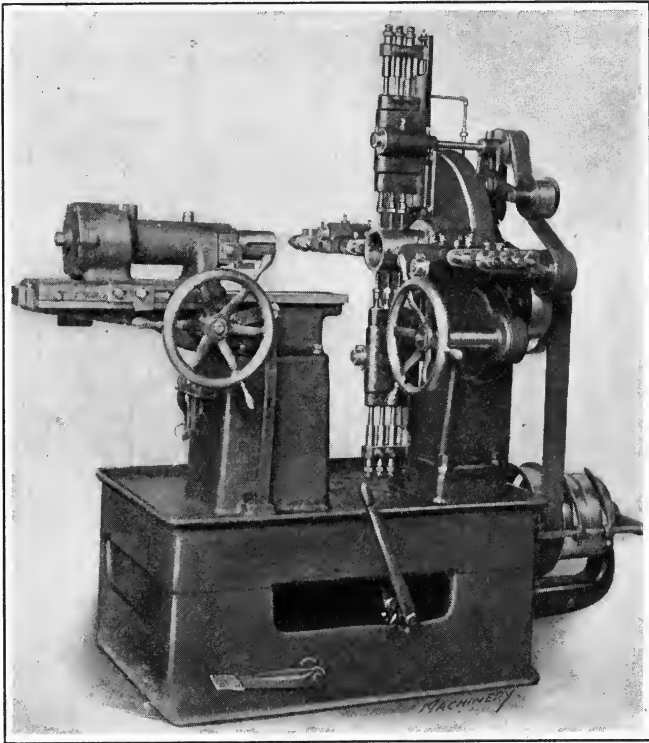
Drilling Machine with Four Sets of Three Opposed Spindles for Drilling Twelve $\frac{1}{8}$ -inch Oil-holes
